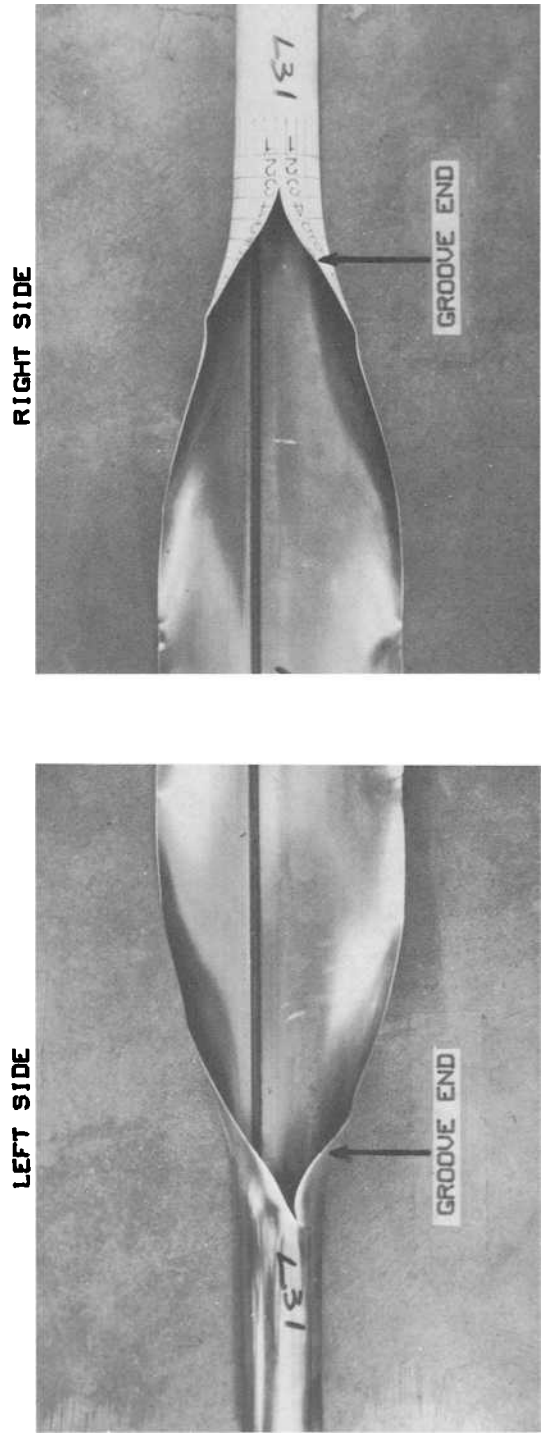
Postfracture pictures at two groove ends. Test No. L30: groove depth 0.38 mm and pressure 6900 kPa.
